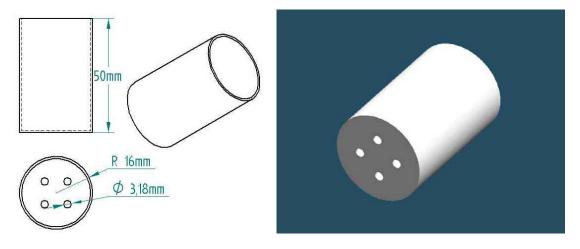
The cylindrical part produced by the injection mold and inserts during experimentation.
